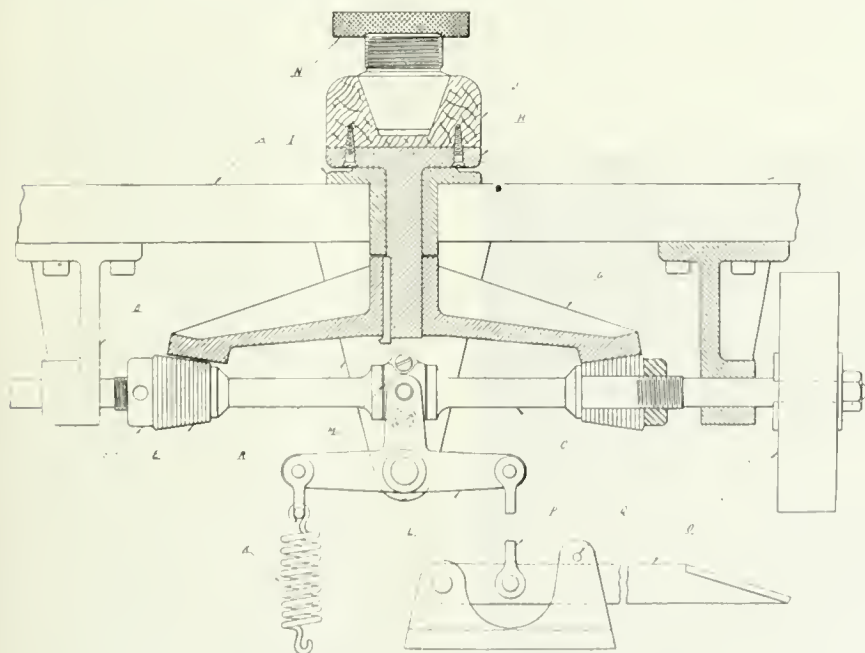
GAUGING MACHINE FOR FUSE THREADS.
